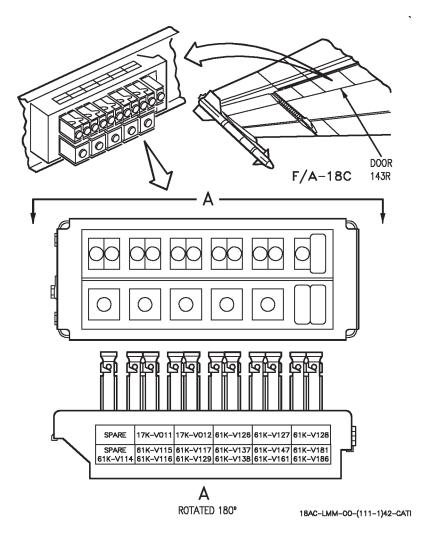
No. 10 Relay Panel Assembly - 52A-V044 (Sheet 1)
